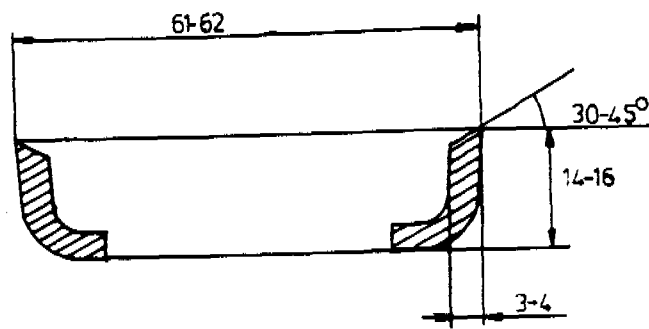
Recommended leather seal dimensions for a 2.5" cylinder.
